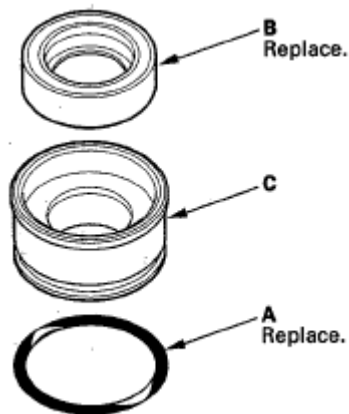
Identifying O-Ring And Cylinder Seal From Rack Bushing
